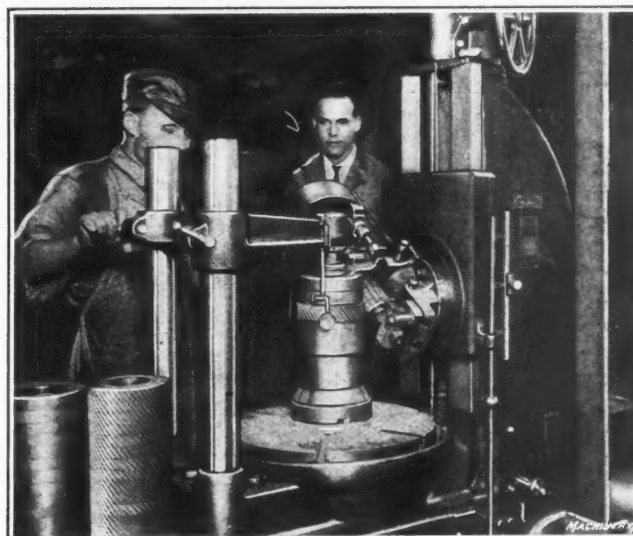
Testing Concentricity of Gears on Gear-hobbing Machine
